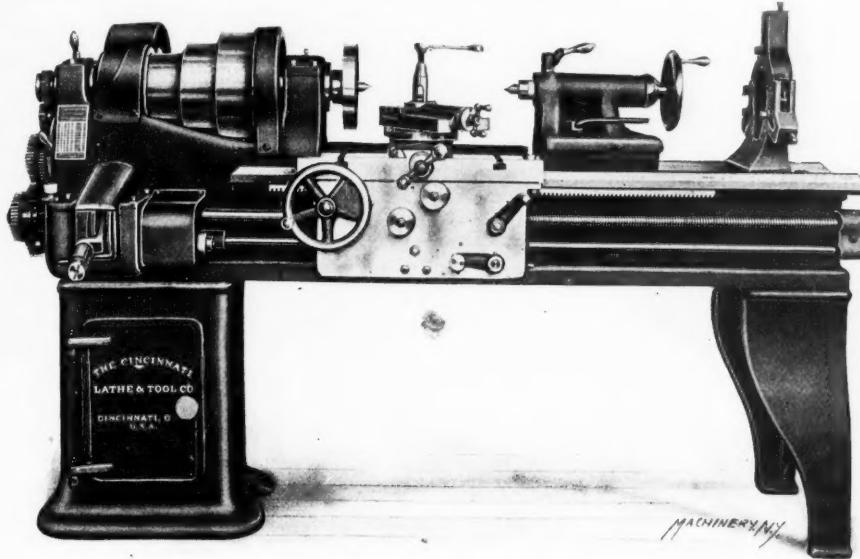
Cincinnati Lathe provided with Improved Quick Feed Change Device.
